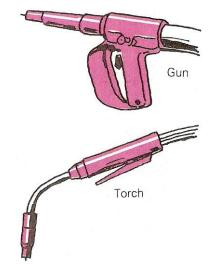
MAGS Welding Gun and Welding Torch
